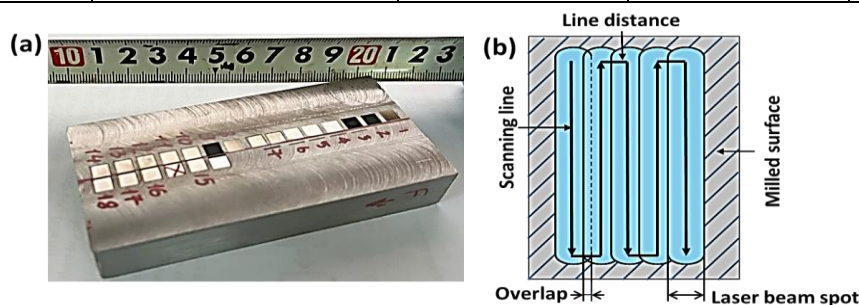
(a) Photograph of the experimental specimen and (b) scanning pattern geometry.
